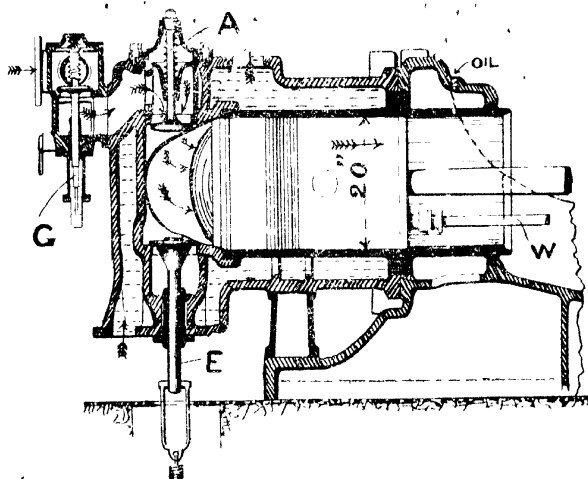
Sectional view of Tangye gas engine, showing disposition of gas, admission and exhaust valves.
